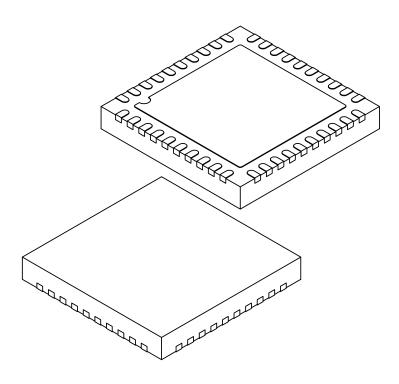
40-VQFN PACKAGE (DRAWING)
